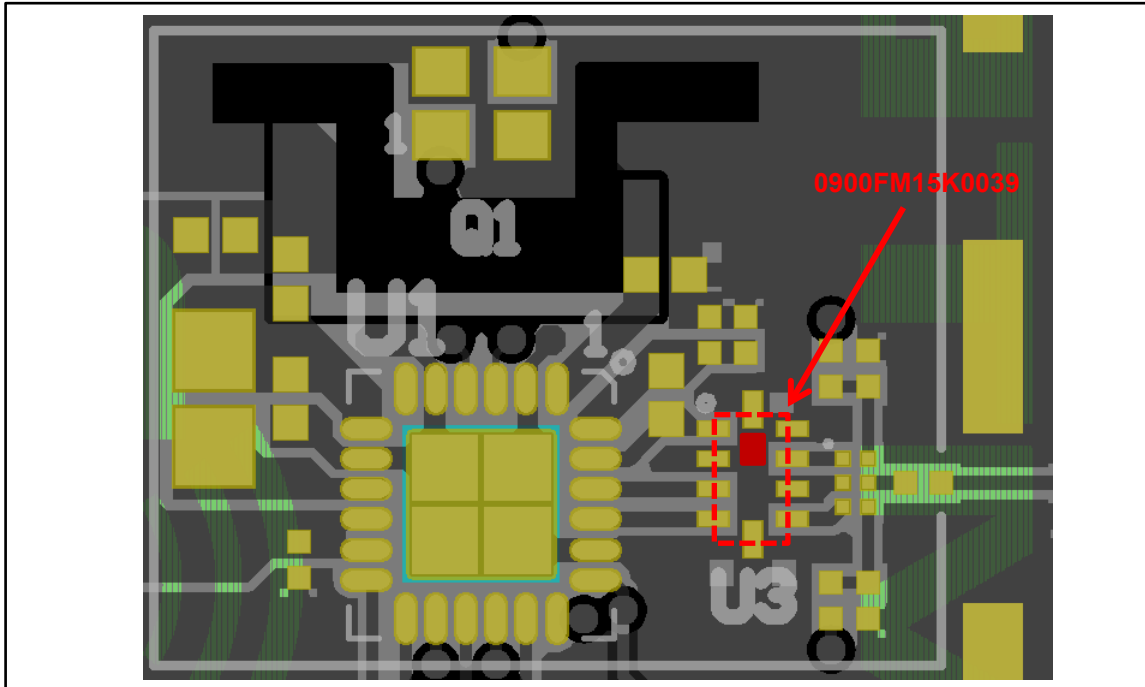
SX1261/2 PCB Layout with Johanson 0900FM15K0039
